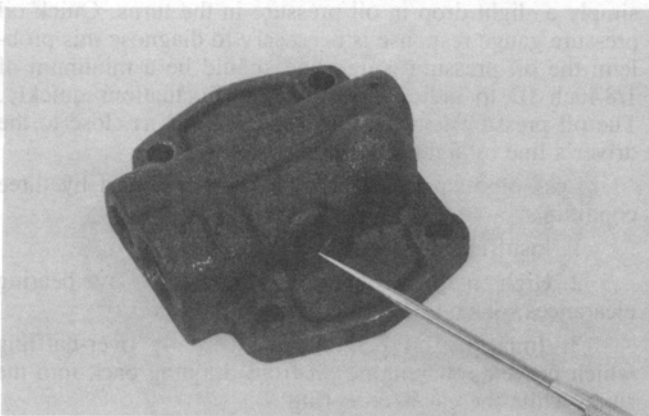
Enlarge high volume oil pump's cross-over passage to .410-inch diameter.
